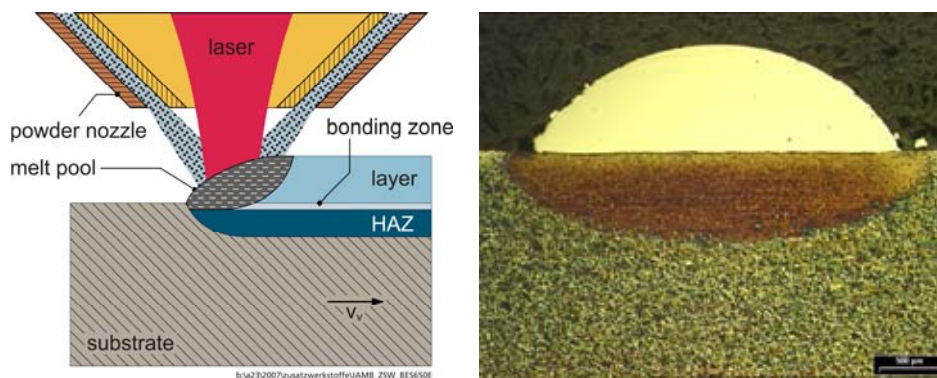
Schematic drawing of the laser cladding process with coaxial powder injection (left); cross section of a laser clad layer (Stellite 21) on a steel substrate (right)
